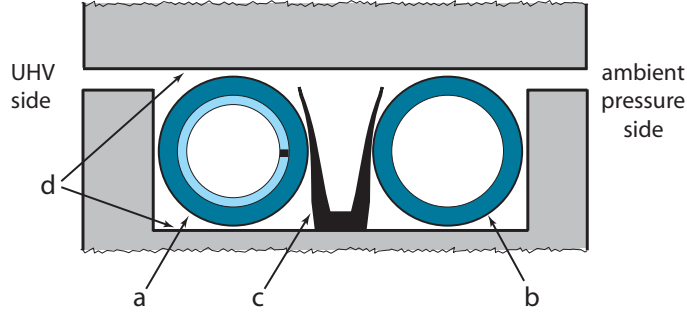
Differentially pumped double O-ring sealing technique. a) spring energised metal O-ring b) metal O-ring c) spacer d) plane surface. When compressed, the metal O-rings will push against the plane surface of the flange, thus sealing off the vacuum region. This method has proven successful for DN500 and Dn1680 flanges.
